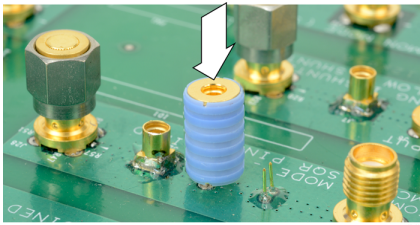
Pushing the MMCX-to-0.1-inch (2.54 mm) adapter in place
